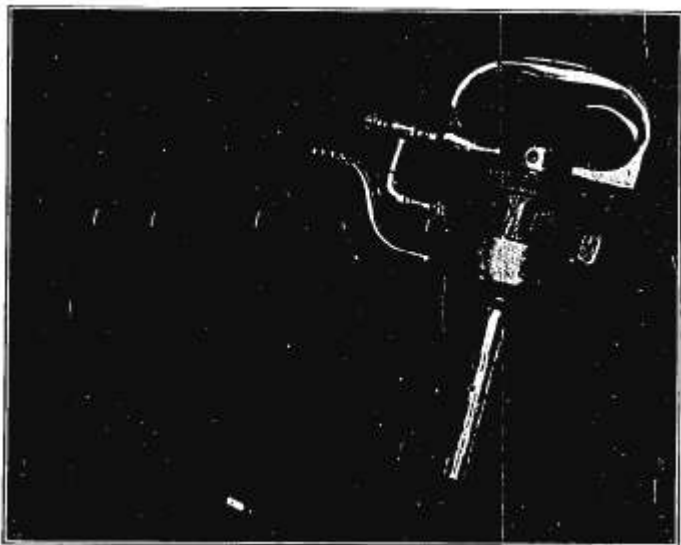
PLATE VI.—Compressed-air motor fitted for using the same cutting tools as the electric motor. Weight, about six pounds. Requires 80 to 90 pounds air pressure. Motor and hose can be boiled.
